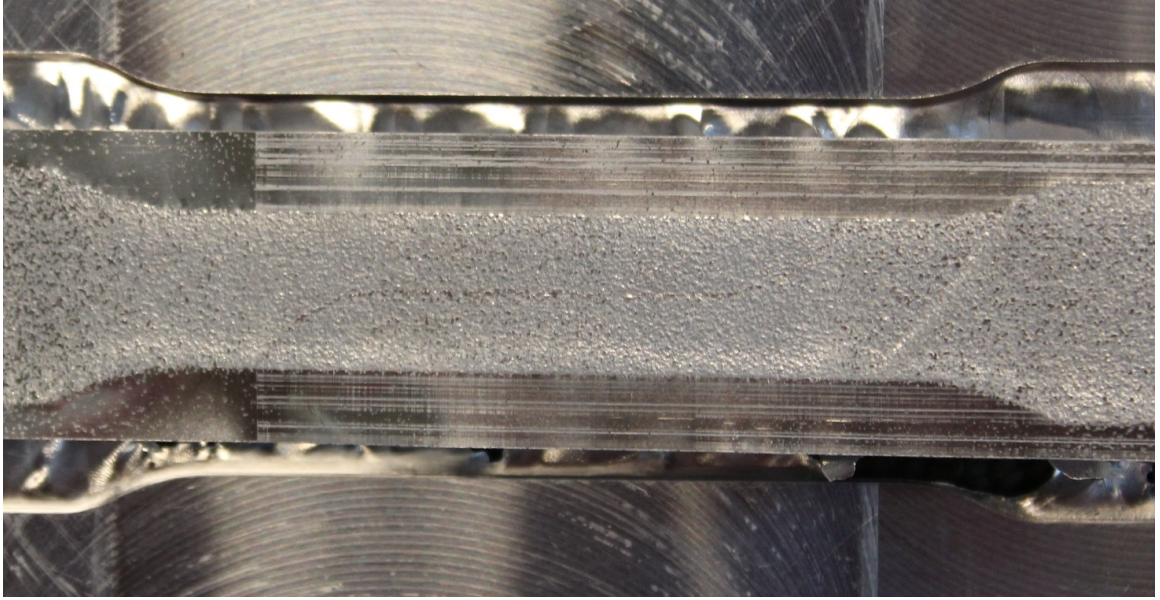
Tearing caused by welding over a sample that was traced too deeply.
